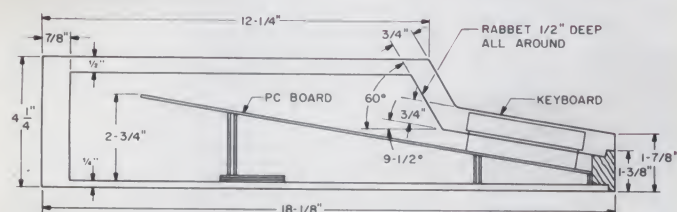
A cross-section view showing dimensions of the side boards and placement of the computer board.
